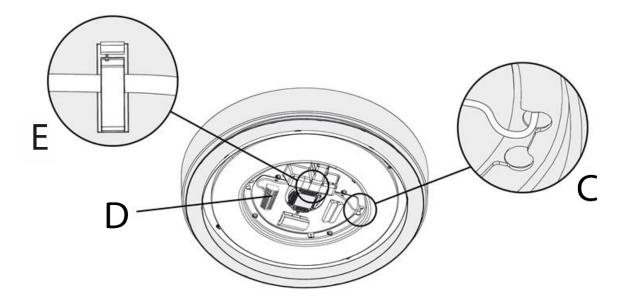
CONNECTION OF ELECTRICAL INSTALALTION
